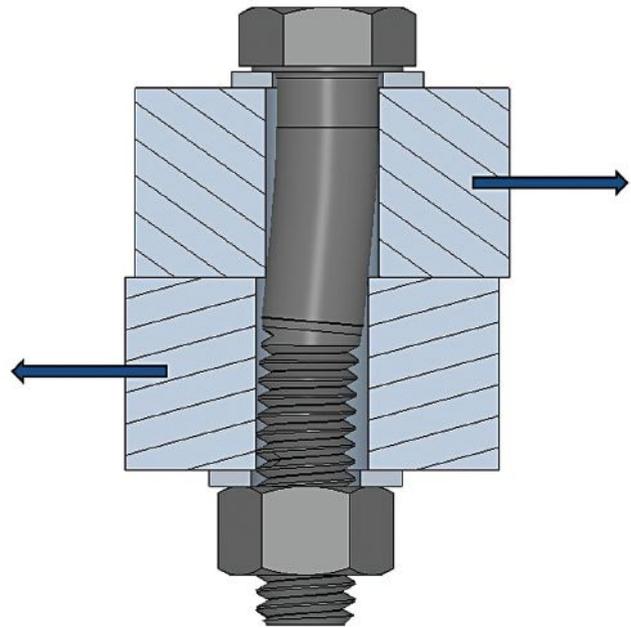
Bolt bending when joint plates slip (image courtesy of Matrix Engineering Consultants).
